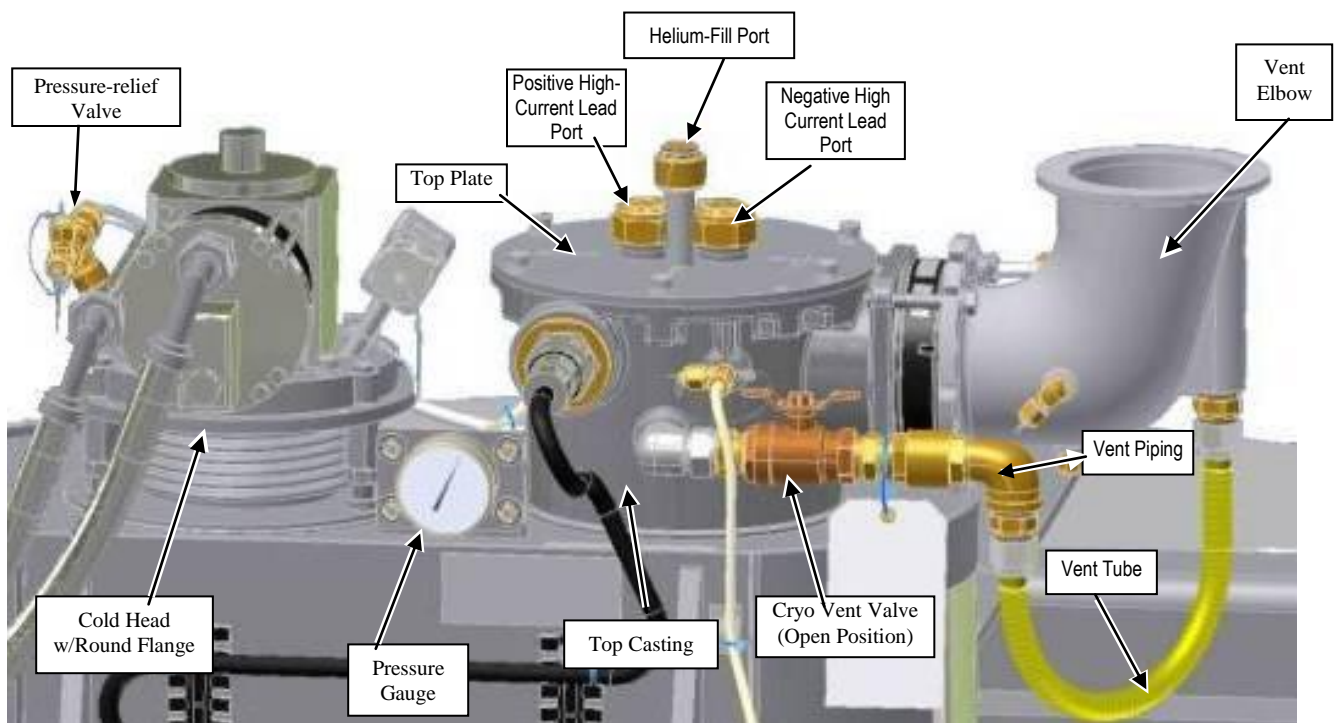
HFO-Y Magnet Top Assembly (without integral valve, with Rupture Disk)
